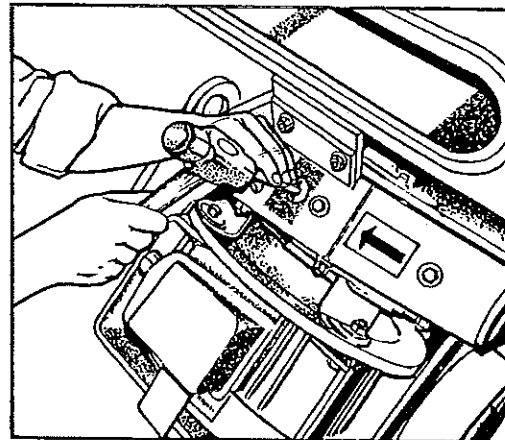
Drive Wheel Blade into Center of Wheel. Remove Blade.
